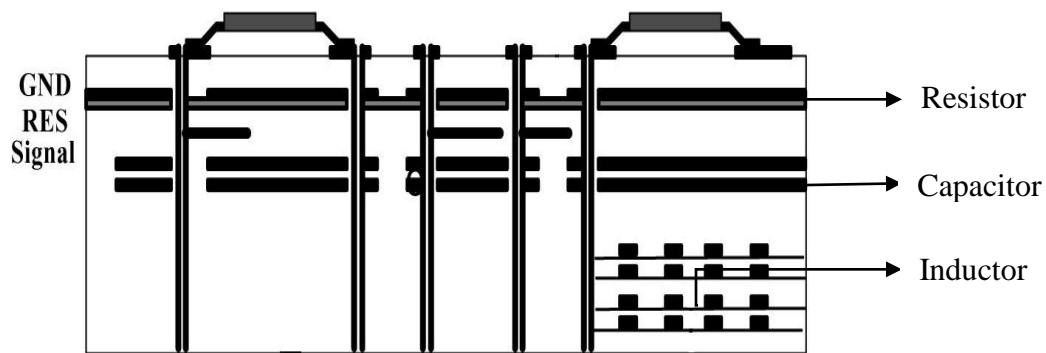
Cross sectional view of a printed circuit board with embedded passives
